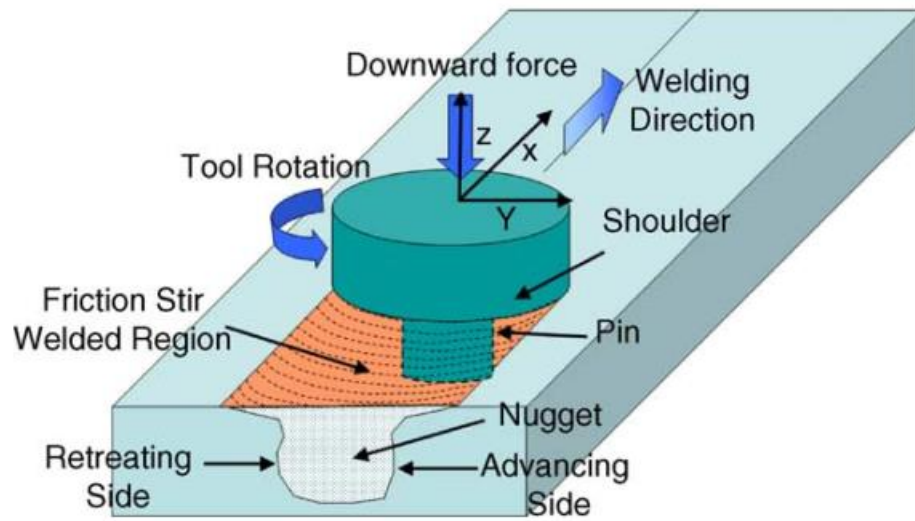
Schematic drawing of Friction stir welding (FSW) [5]
